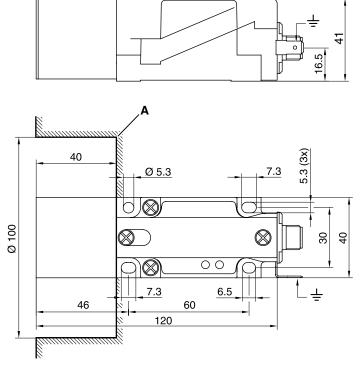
BIS L-409-045-001-07-S4 with integrated read head, dimensions in mm
